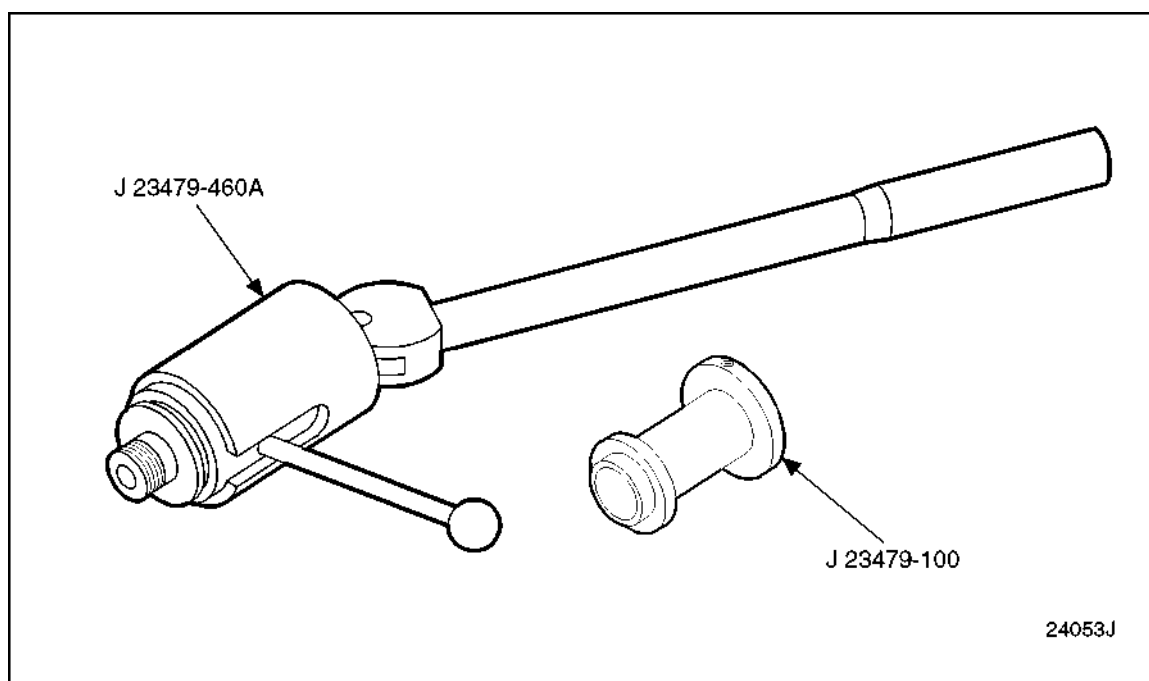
Valve Seat Insert Remover (Intake)J 23479-460-A
